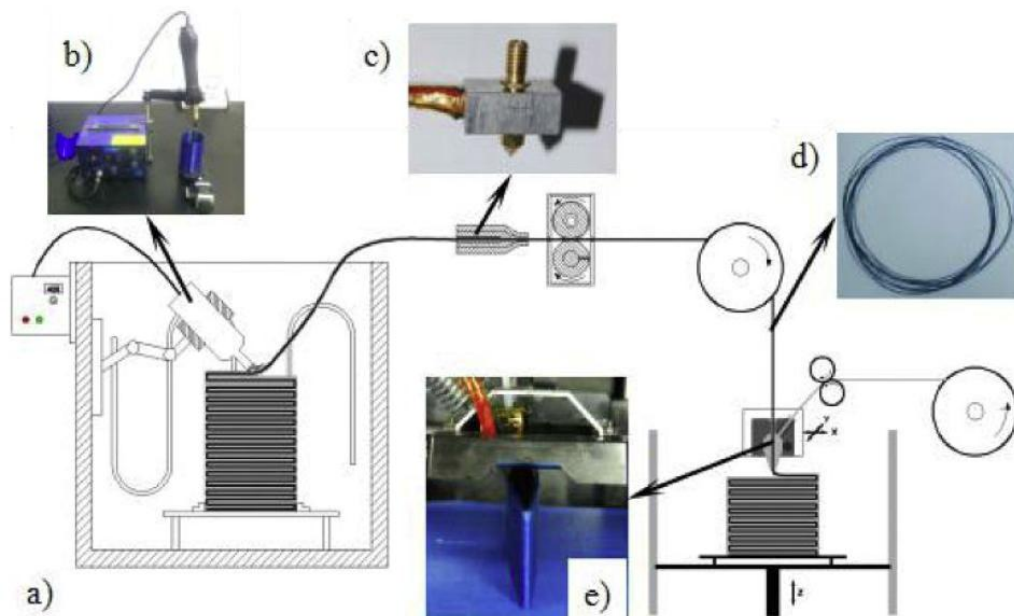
Scheme of recycling and remanufacturing of 3D printed continuous carbon fiber reinforced thermoplastic parts (a). b) hot air gun, c) remolding nozzle, d) recycled impregnated filament, e) remanufacturing process [13]
